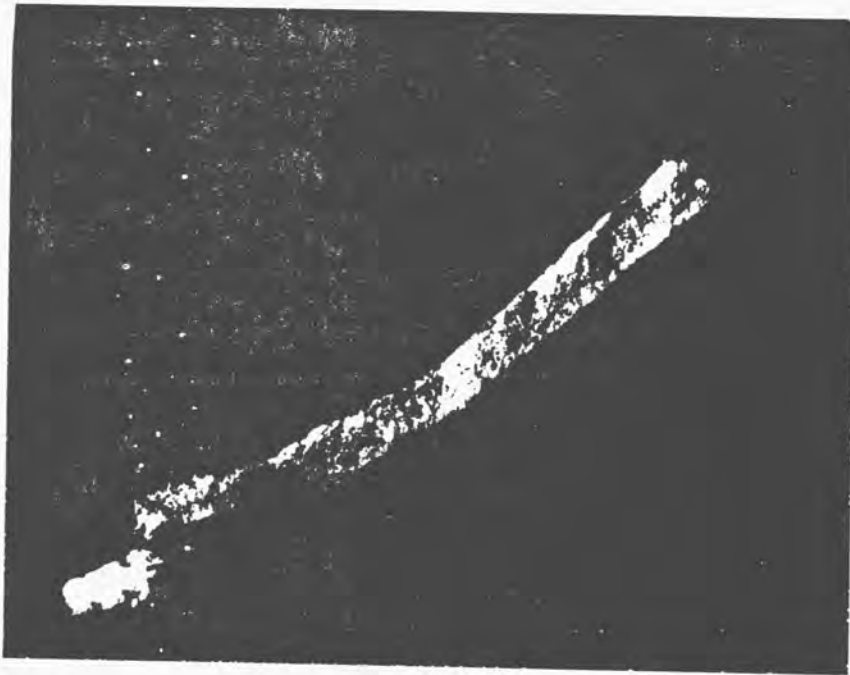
Fractured surface on pushrod tube (exhibit 1) showed plastic deformation and shear lip indicating a shear overload fracture mode.
